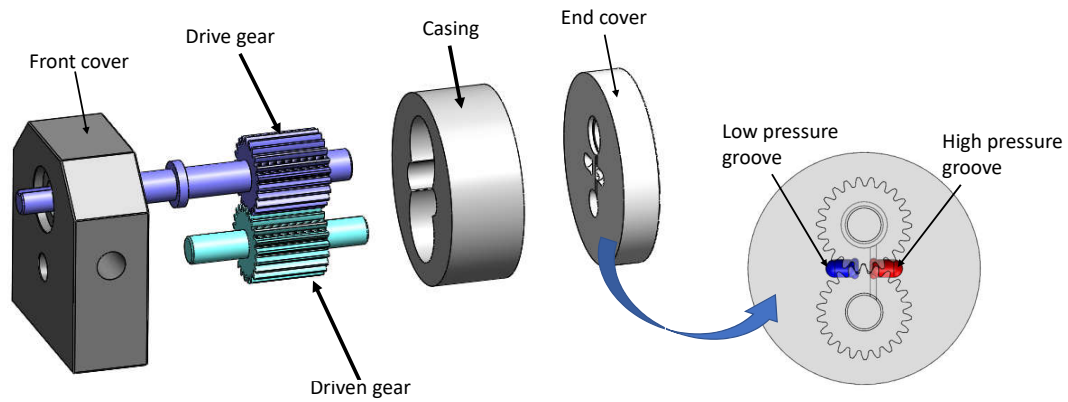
Exploded view of a reference external gear machine (E1 in Table 1.1). Relief grooves on the end cover are shown in the front view on the right for clarity
